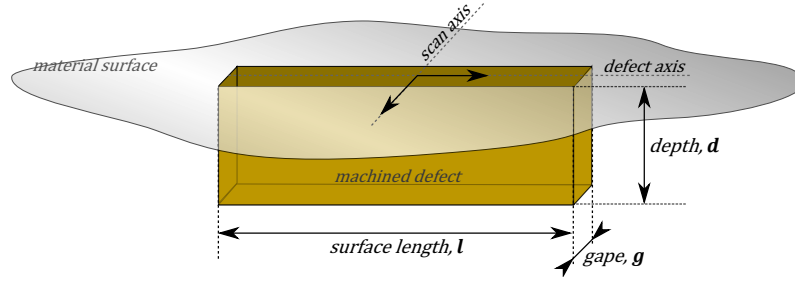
Diagram of machined defect dimension geometry.
